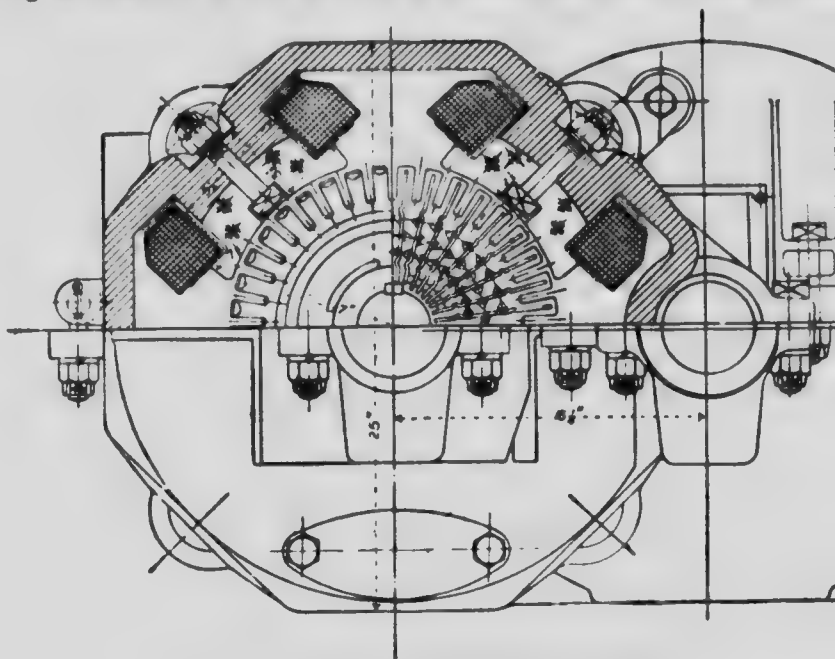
End View and Section of Brush Tramcar Motor.
